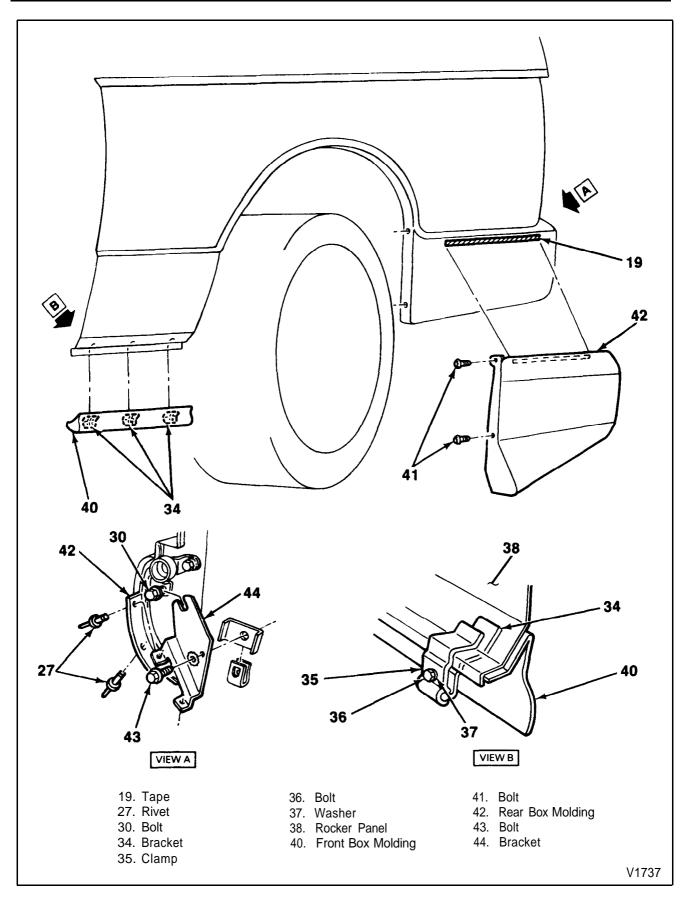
Front and Rear Box Moldings (Sonoma GT)
